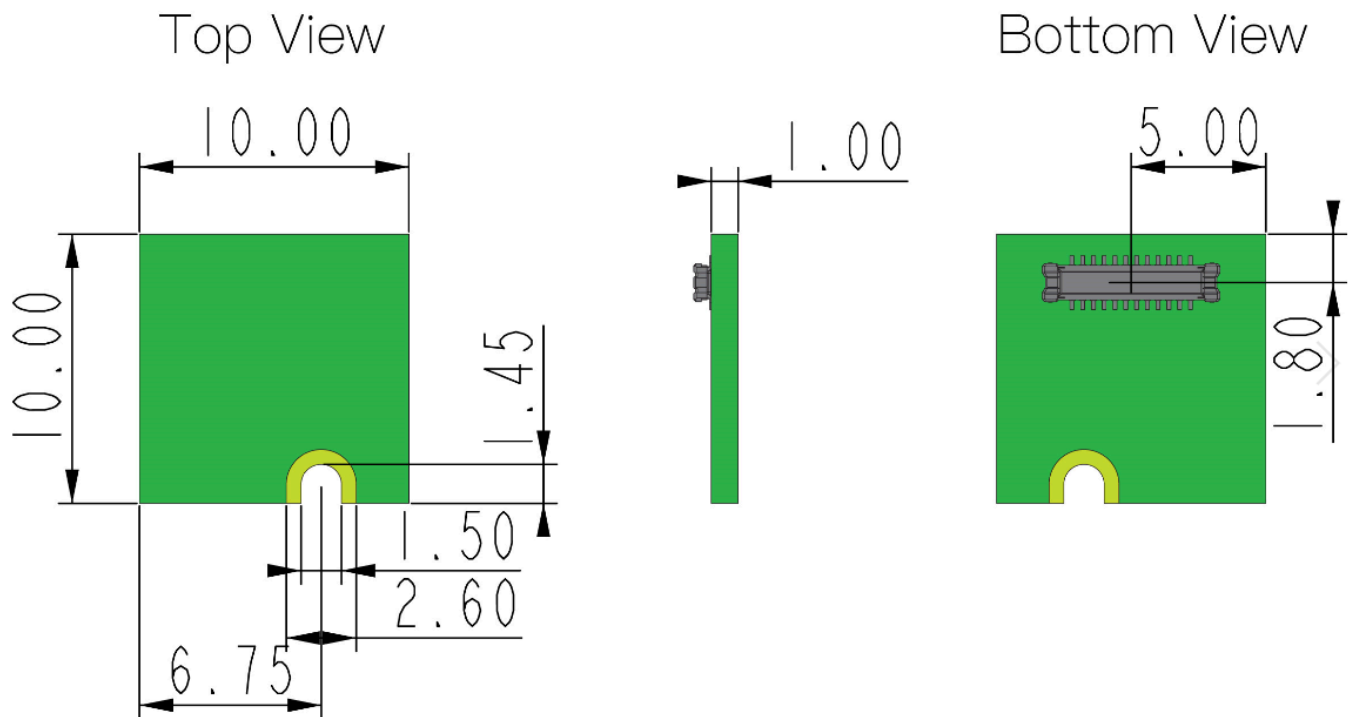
RAK19002 WisBlock Boost Module Mechanic Drawing
